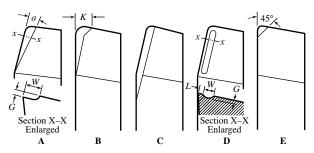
Different Forms of Chipbreakers for Turning Tools
